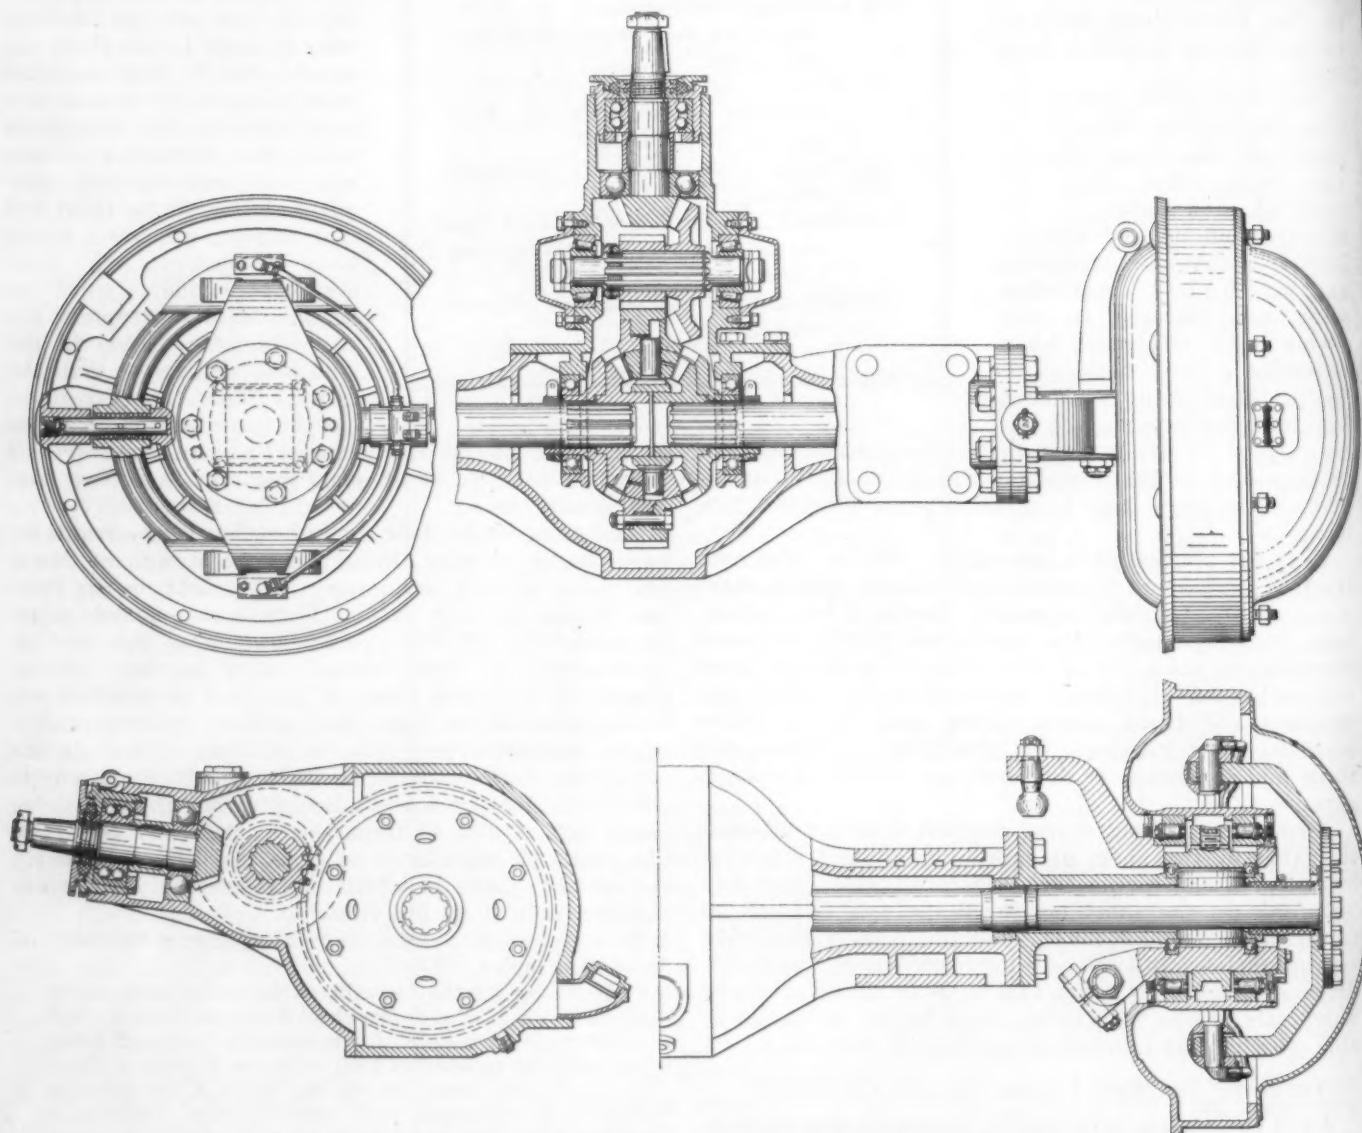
FRONT AXLE USED IN THE COLEMAN FOUR-WHEEL-DRIVE TRUCK
